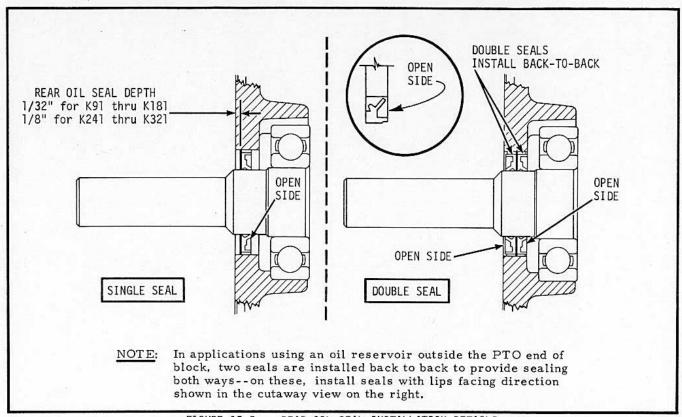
REAR OIL SEAL INSTALLATION DETAILS
